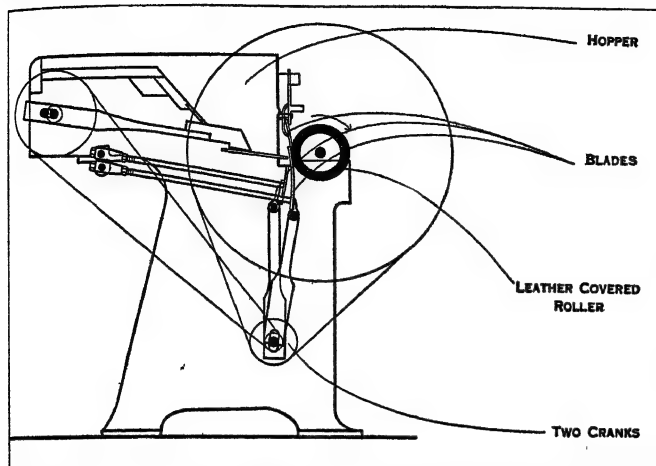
SECTION OF MACARTHY GIN, MACHINE EMPLOYED TO CLEAN BOTH LONG AND SHORT STAPLE COTTONS
